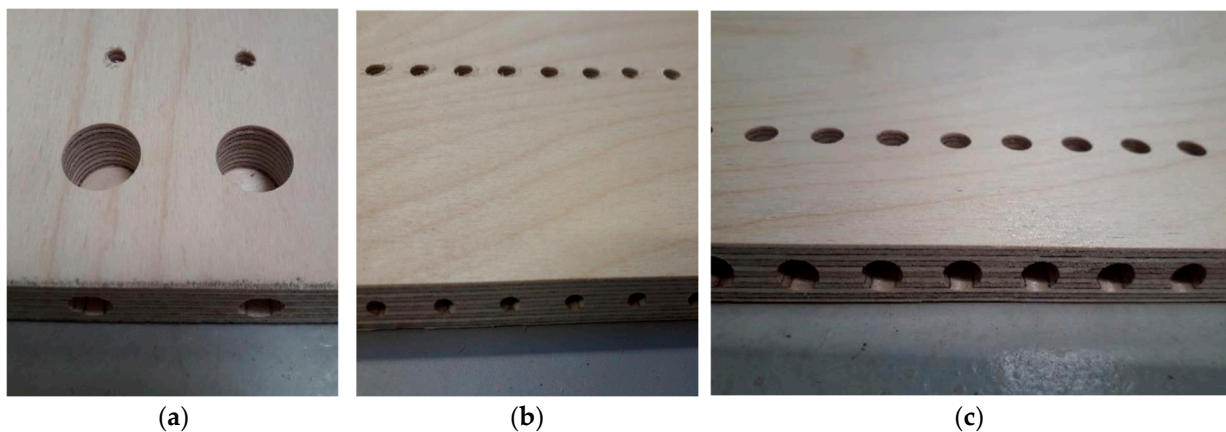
(a): drilled holes for an eccentric joint; (b): drilled holes for a confirmat screw (two holes); (c): drilled holes for a dowel connector (two holes).
